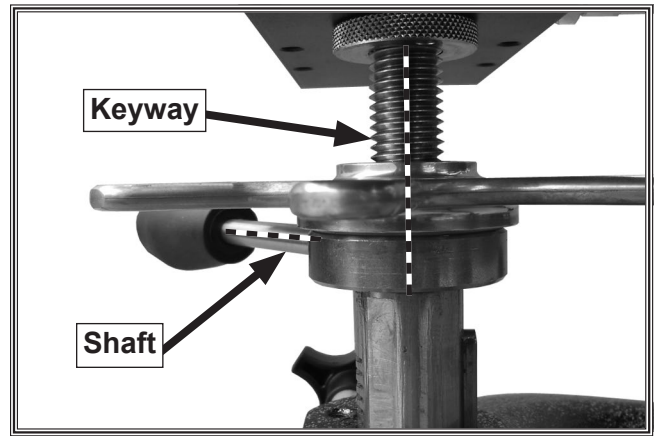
Keyway aligned with fine elevation lock knob shaft.
